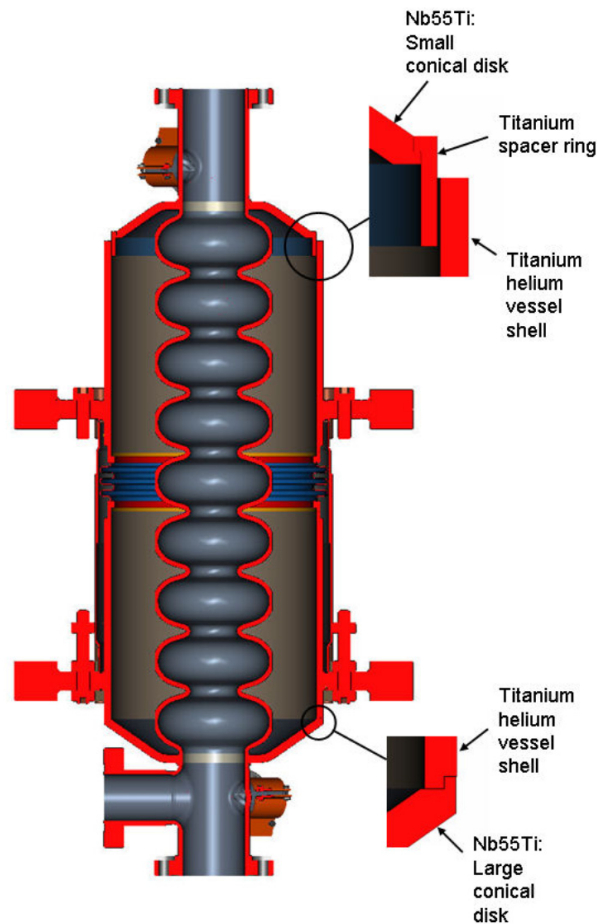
Breakaway view of dressed cavity showing the weld joint geometry.
